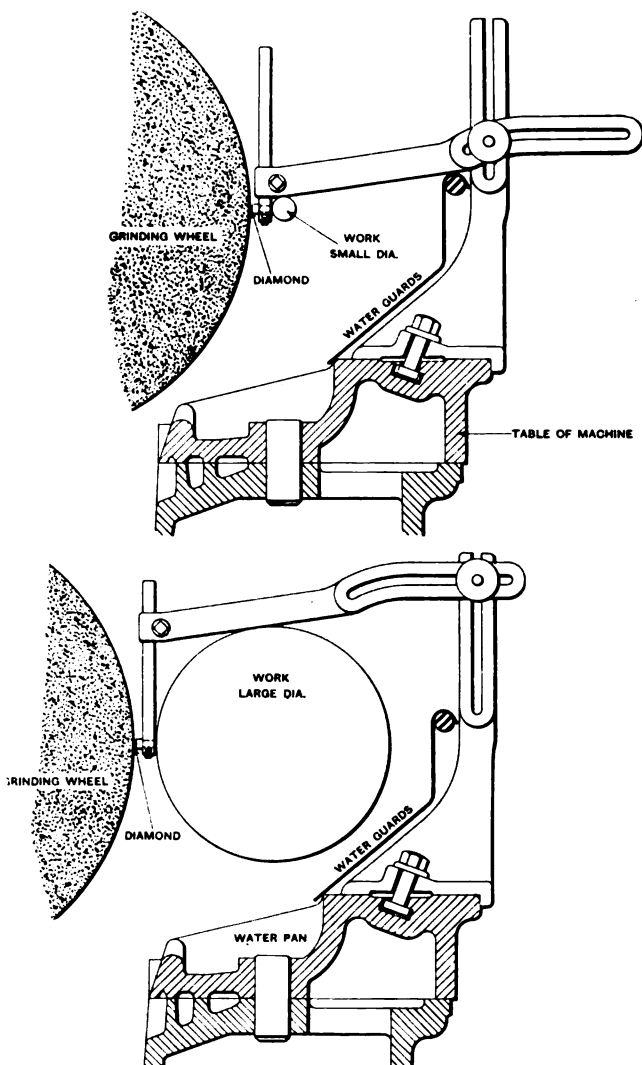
Grinding Wheel Truing Fixture, showing method of using and extreme setting positions for work of large and small diameters
